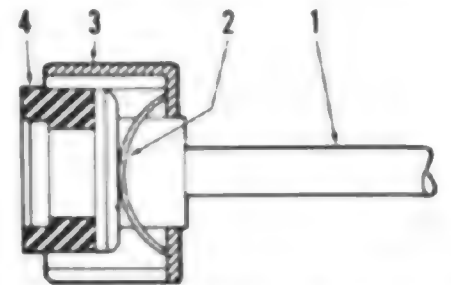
Cross-sectional view showing the seal installed on valve stem.
